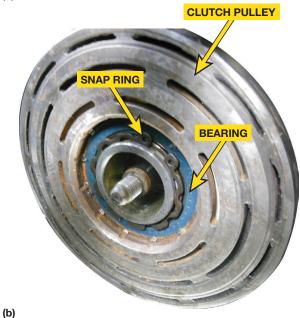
(a) The pulley assembly is removed using a special puller on this Dodge truck. (b) The pulley assembly includes the bearing which may or may not be a replaceable part, depending on the compressor.
